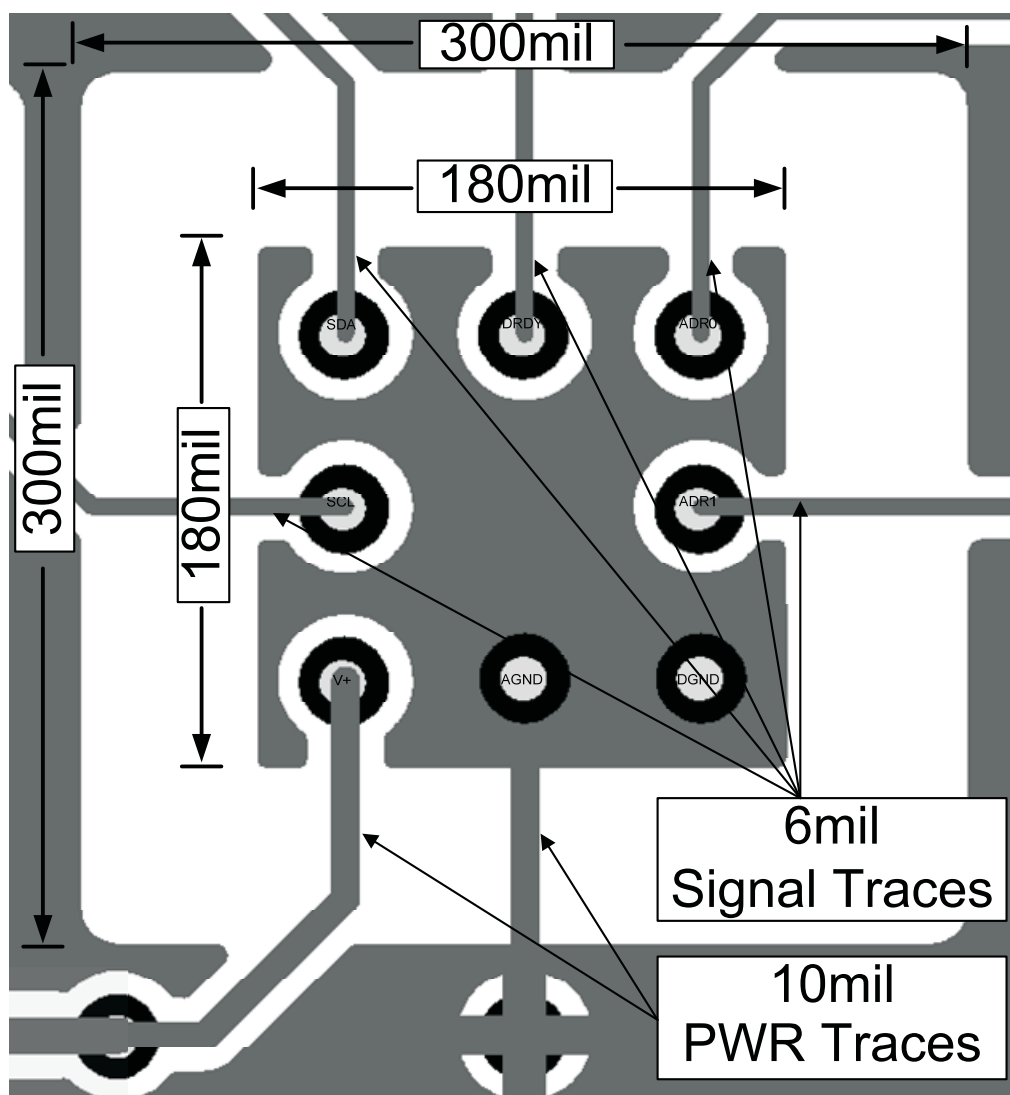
TMP006 Two-Layer PCB: Bottom Layer
